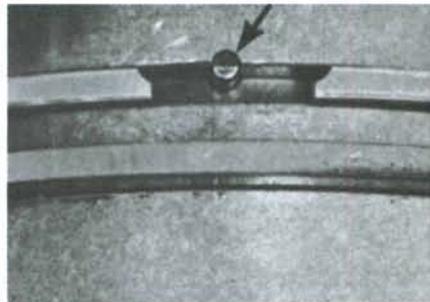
Piston rings are pinned as shown (arrow). Note that upper ring is installed so that notches in ring ends are up.
